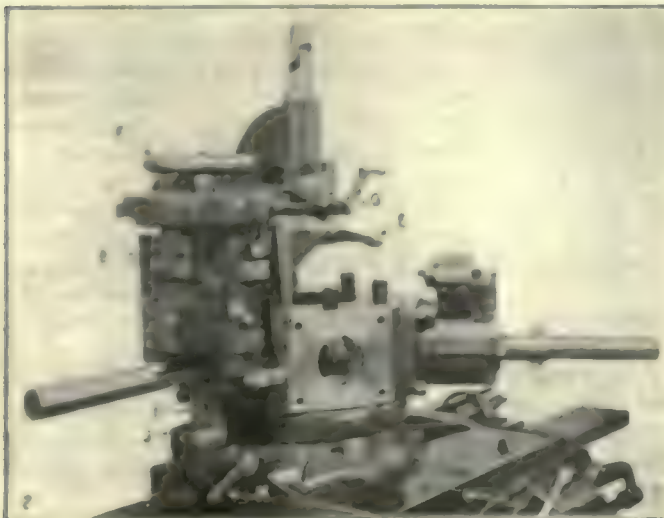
MECHANISM OF TURRET TOOLSLIDE. FIG. 3—REAR VIEW, SHOWING CHANGE GEARS
